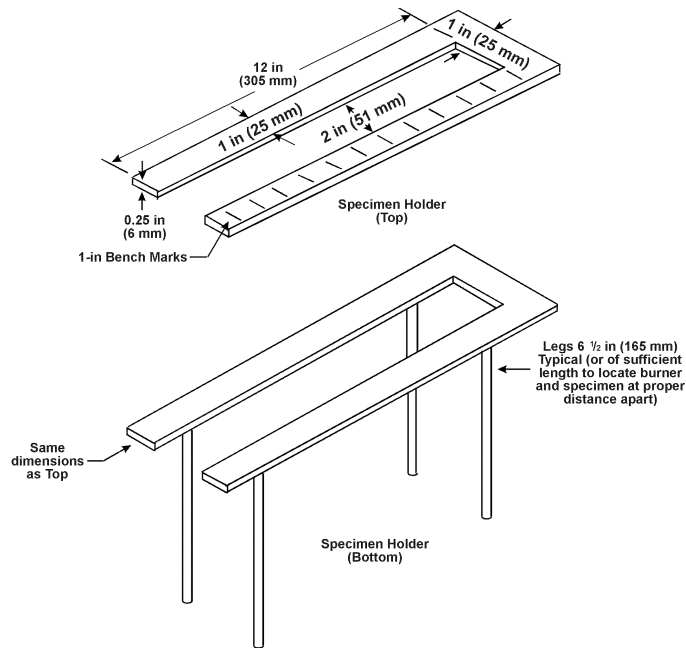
Horizontal Bunsen Burner Test Specimen Holder
